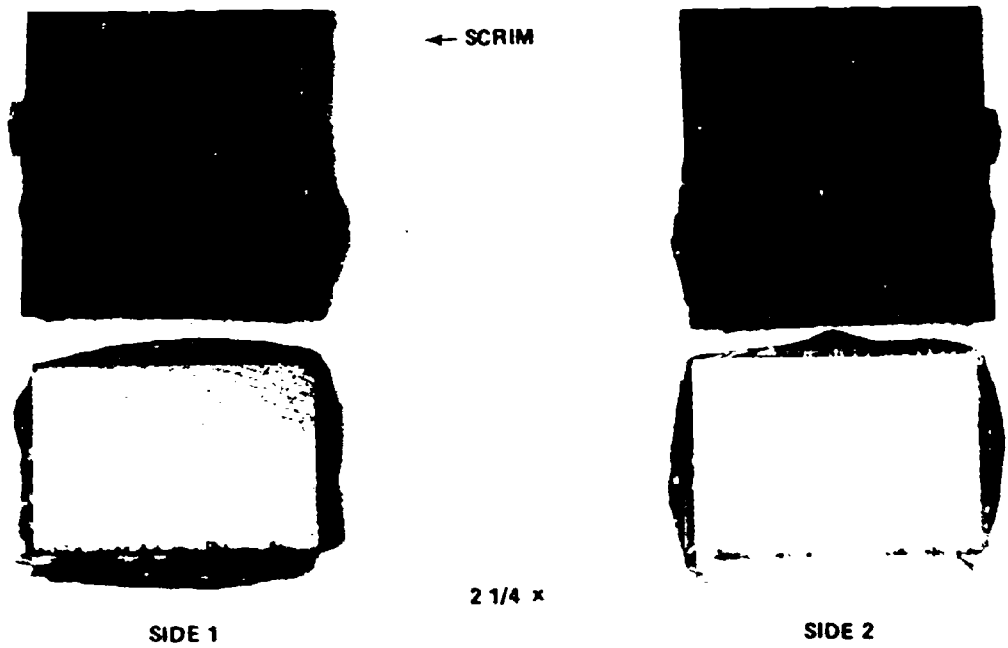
ENLARGED PHOTO OF BOND FAILURE ON Z4824824-1 SPECIMEN
